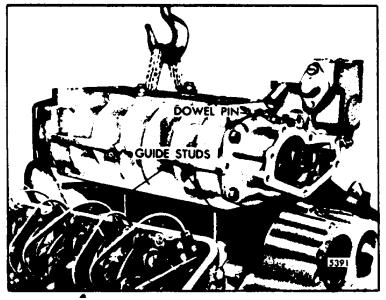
Removing/installing Blower (6V-53 Engine)
